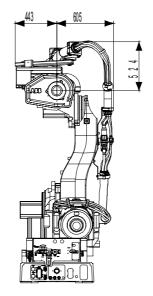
External routing option 780-2 and 781-1 (Dimensions in mm).
